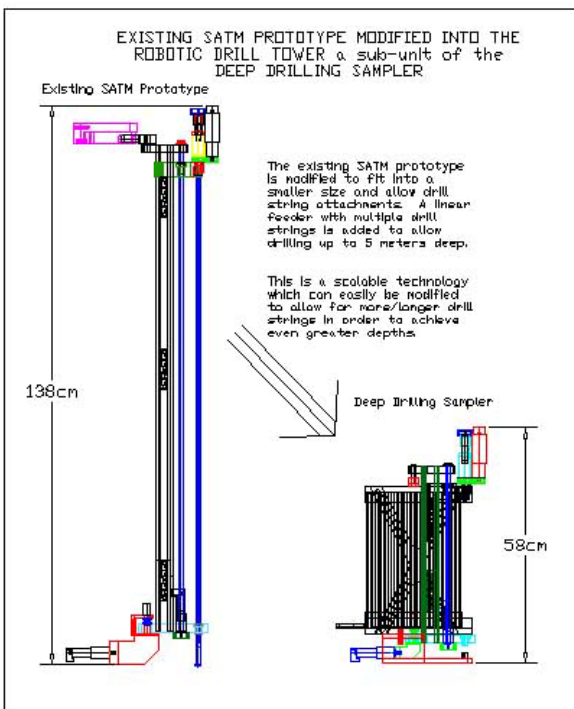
A copy of the existing Champollion/ST4 SAMT prototype will be modified into a Robotic Drill Tower capable of accepting drill string segments.
